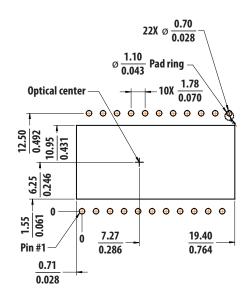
2D assembly drawing of ADNS-7700 sensor coupled with ADNS-6180-002 lens, PCB & base plate
